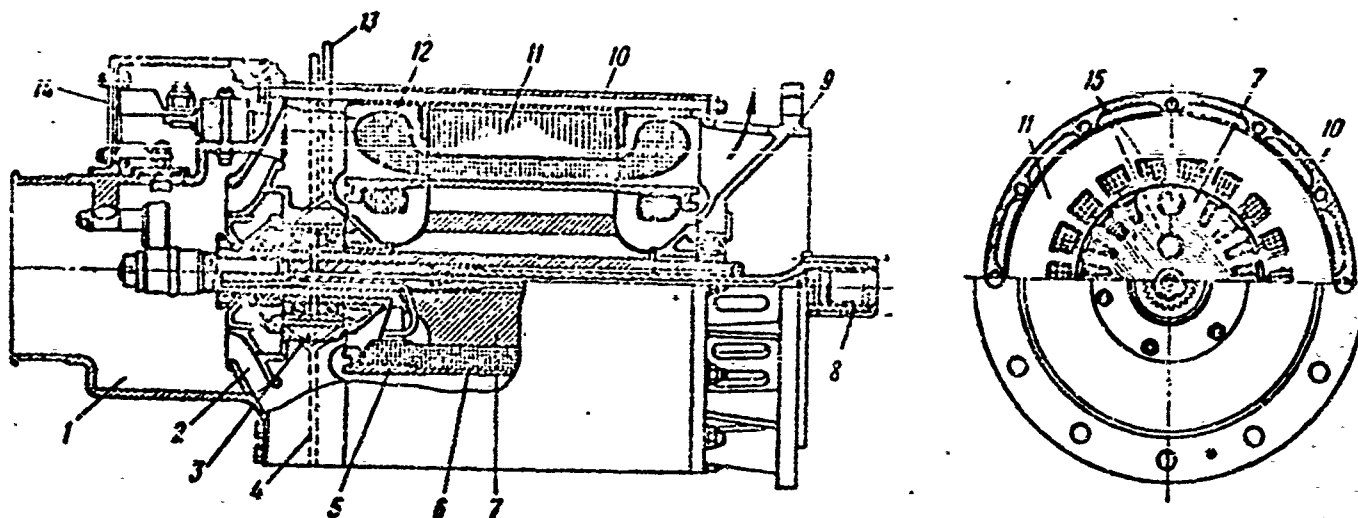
Air-cooled three-phase salient-pole aircraft generator. 1) Air duct; 2) fan; 3) bearings; 4) oil outlet; 5) band; 6) rotor winding; 7) rotor core; 8) flexible shaft; 9) flange piece; 10) stator frame; 11) armature core; 12) armature winding; 13) oil inlet; 14) lead box; 15) air passages.
